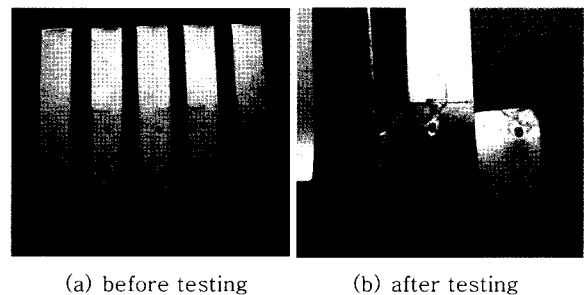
Tensile shear test of spot welded TRIP60K steel
